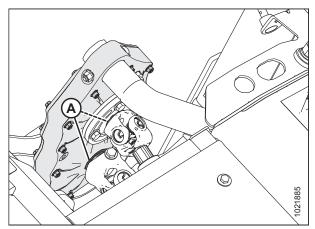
Right Side Roll Timing Gearbox Bearings
